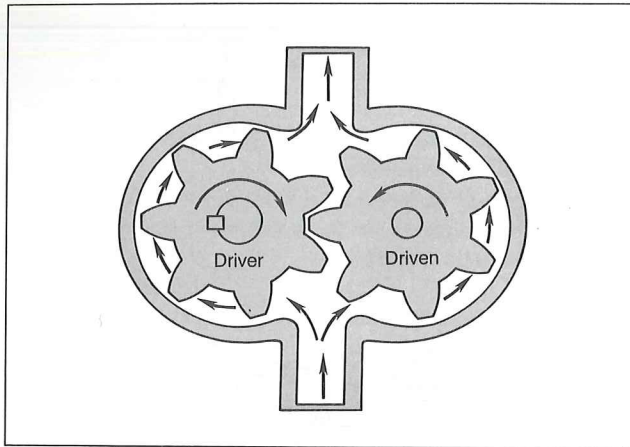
In gear pumps, the gears rotate within the housing and sweep fluid from the inlet to the outlet.
